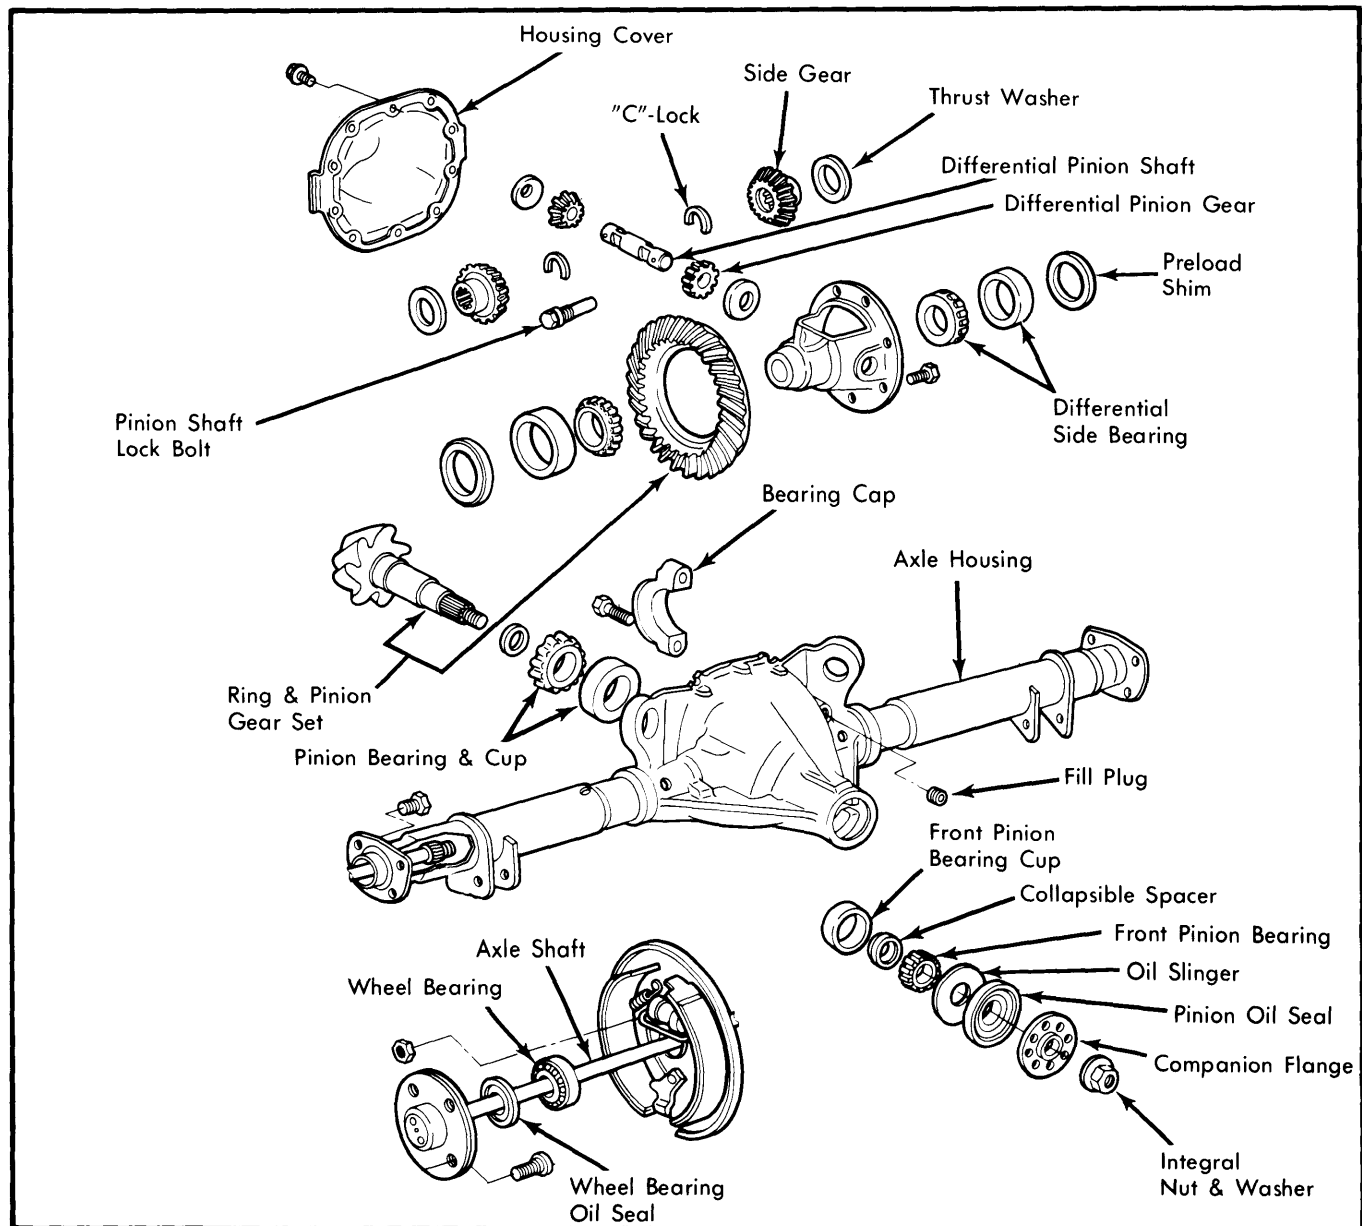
Ford Motor Co. Integral Carrier Axle (WGX Type)
